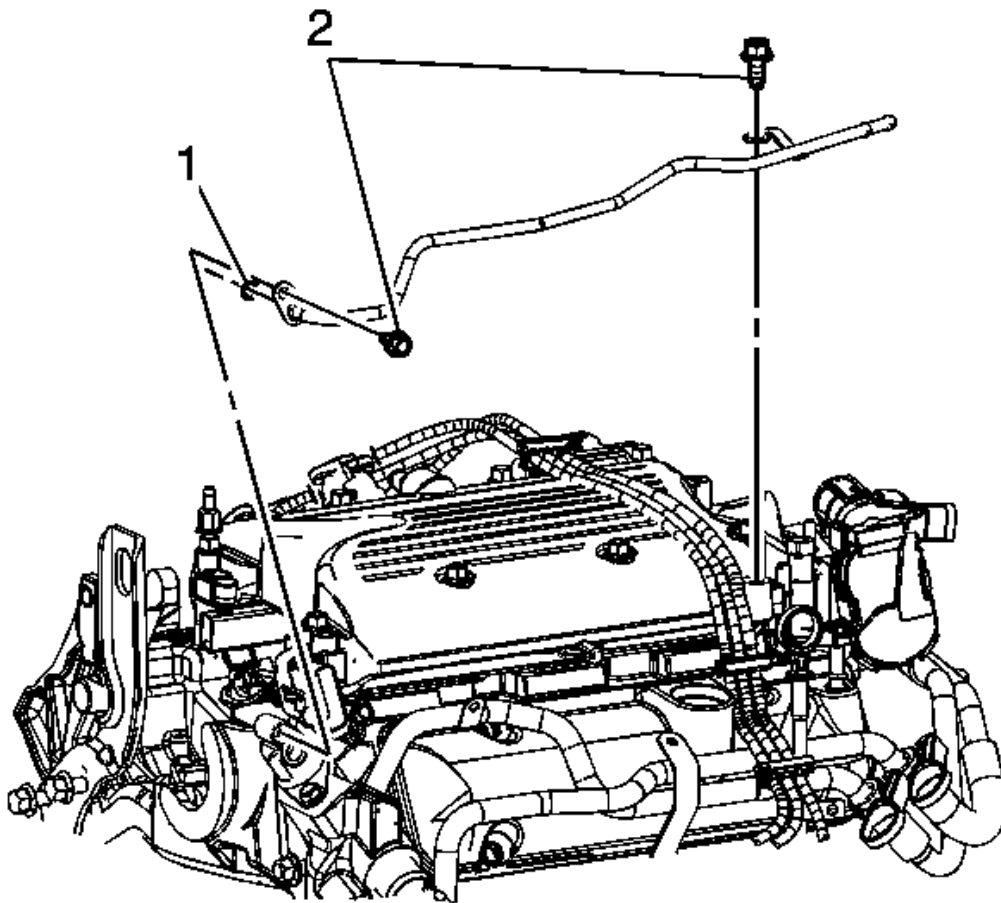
Identifying Radiator Surge Tank Inlet Pipe Bolts
